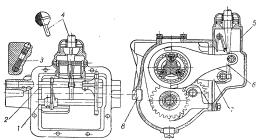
Gear Shift Mechanism 2 - gear shift shaft, 3 - lock, 4 - gear shift lever, 5 - gear shift mechanism cover,
